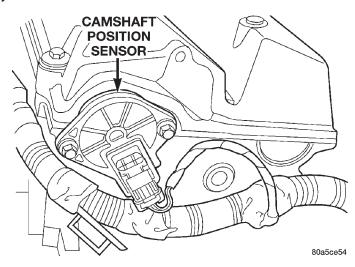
Camshaft Position Sensor—2.4L DOHC
